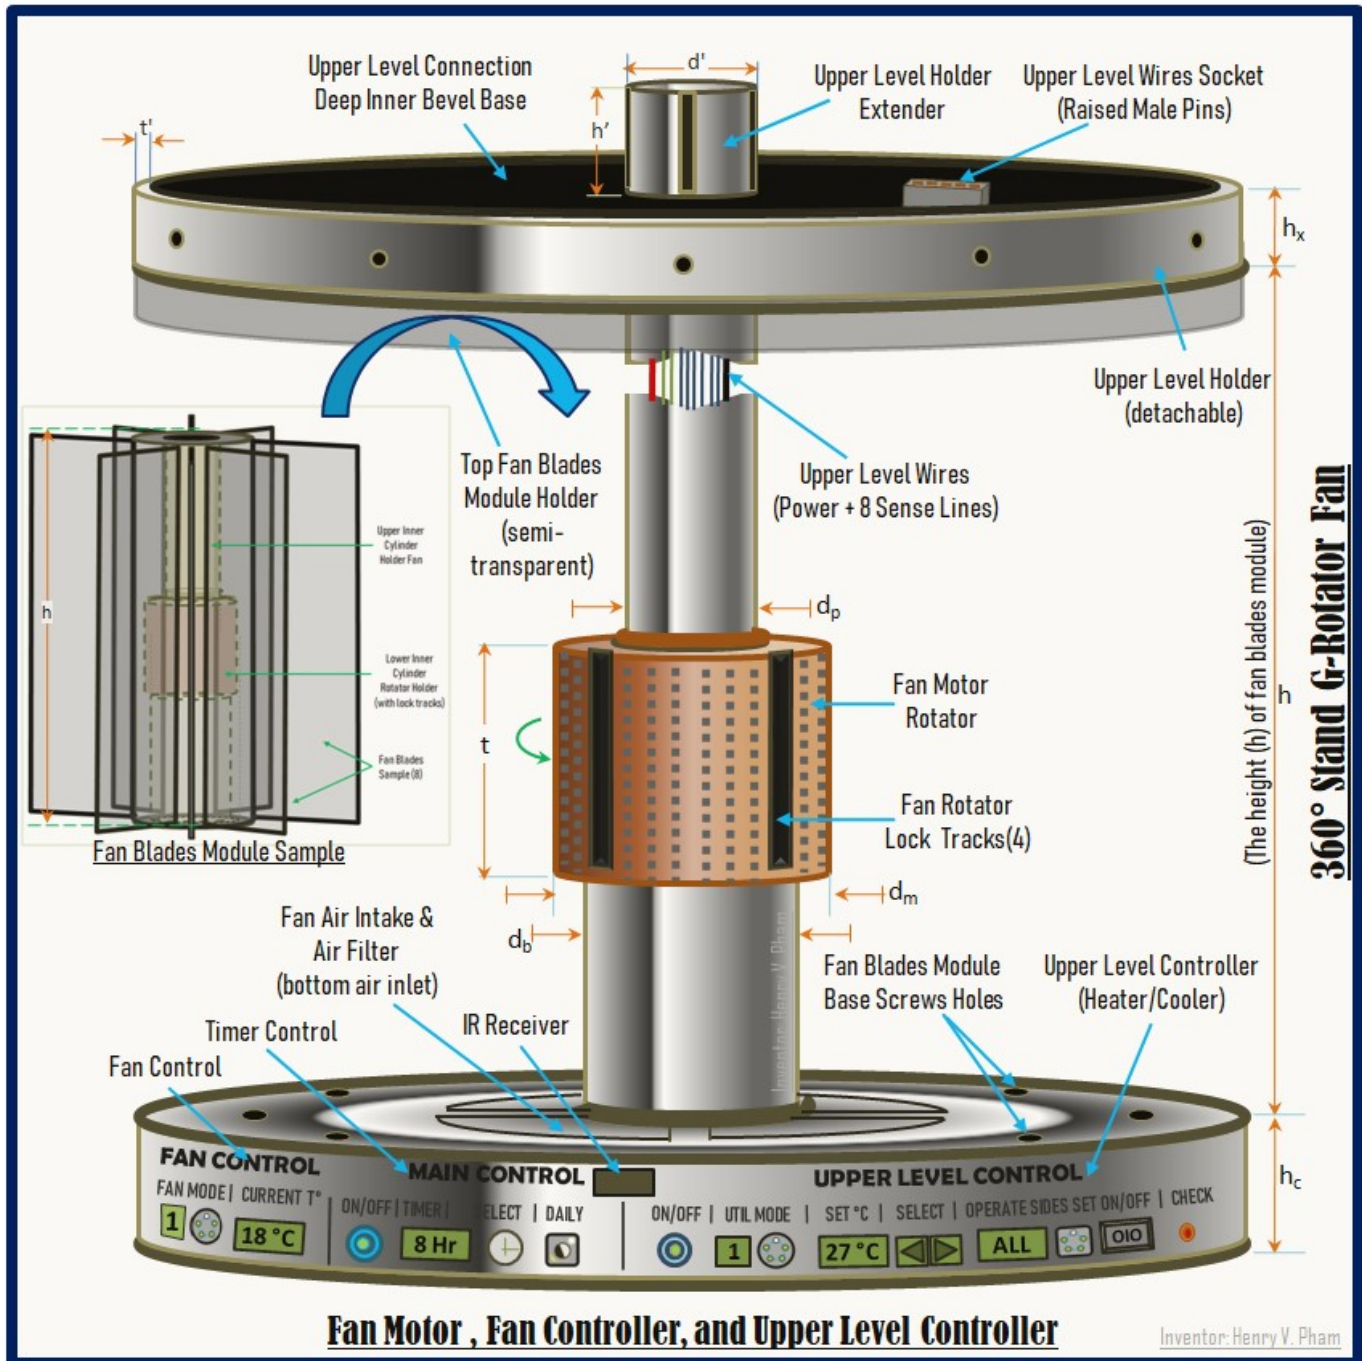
360° Stand G-Rotator Fan – Fan Top & Bottom Bases Layout Structure
